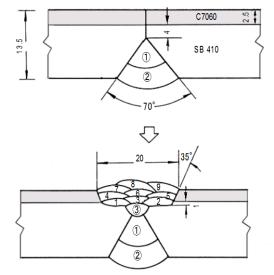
Groove preparations and weld pass sequence in welding of 90/10 cupronickel clad steel [Ref. 6]
